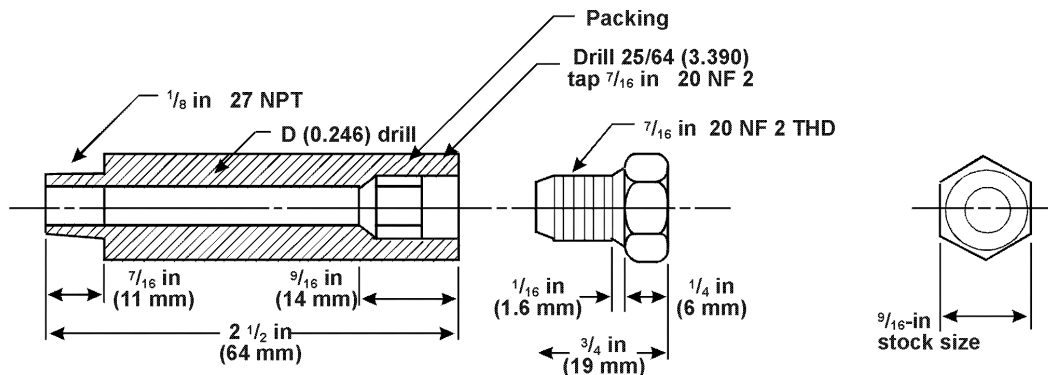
Btu Heat Transfer Device—Thermometer Mounting
